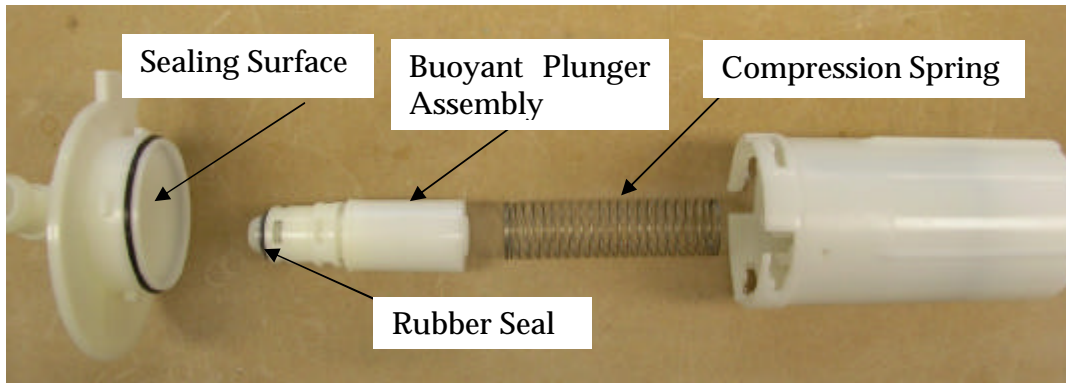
Chrysler Cirrus fuel vapour port – disassembled.
